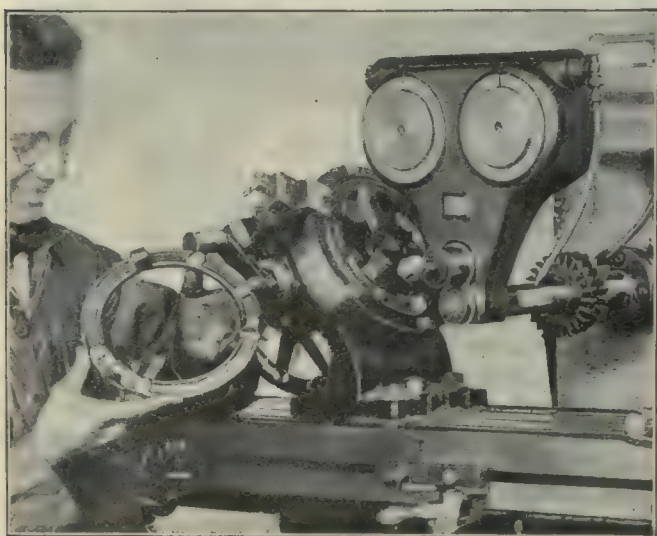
FIXTURE FOR MILLING CLUTCH RINGS
